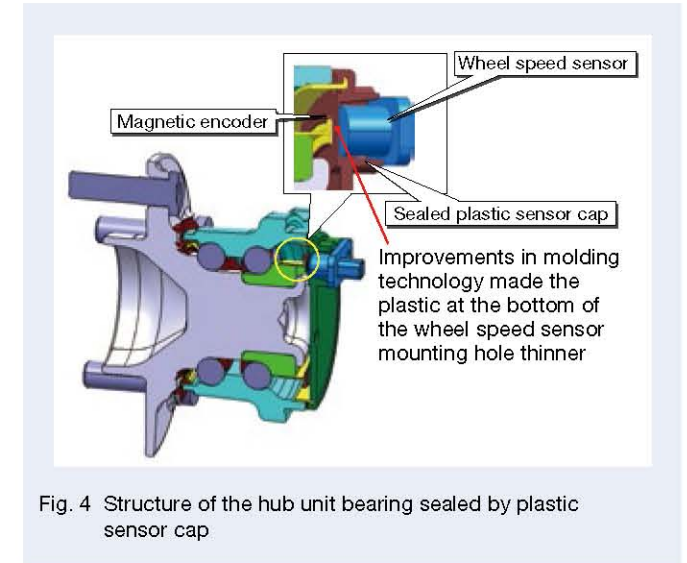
Structure of the hub unit bearing sealed by plastic sensor cap
